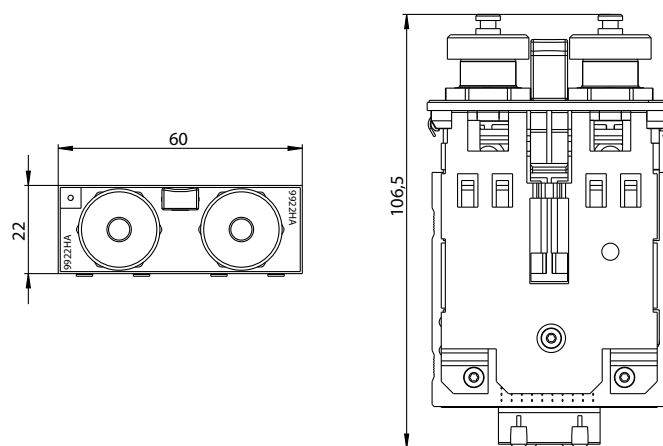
MM900 dimension drawing 6: M12 ports electrical
